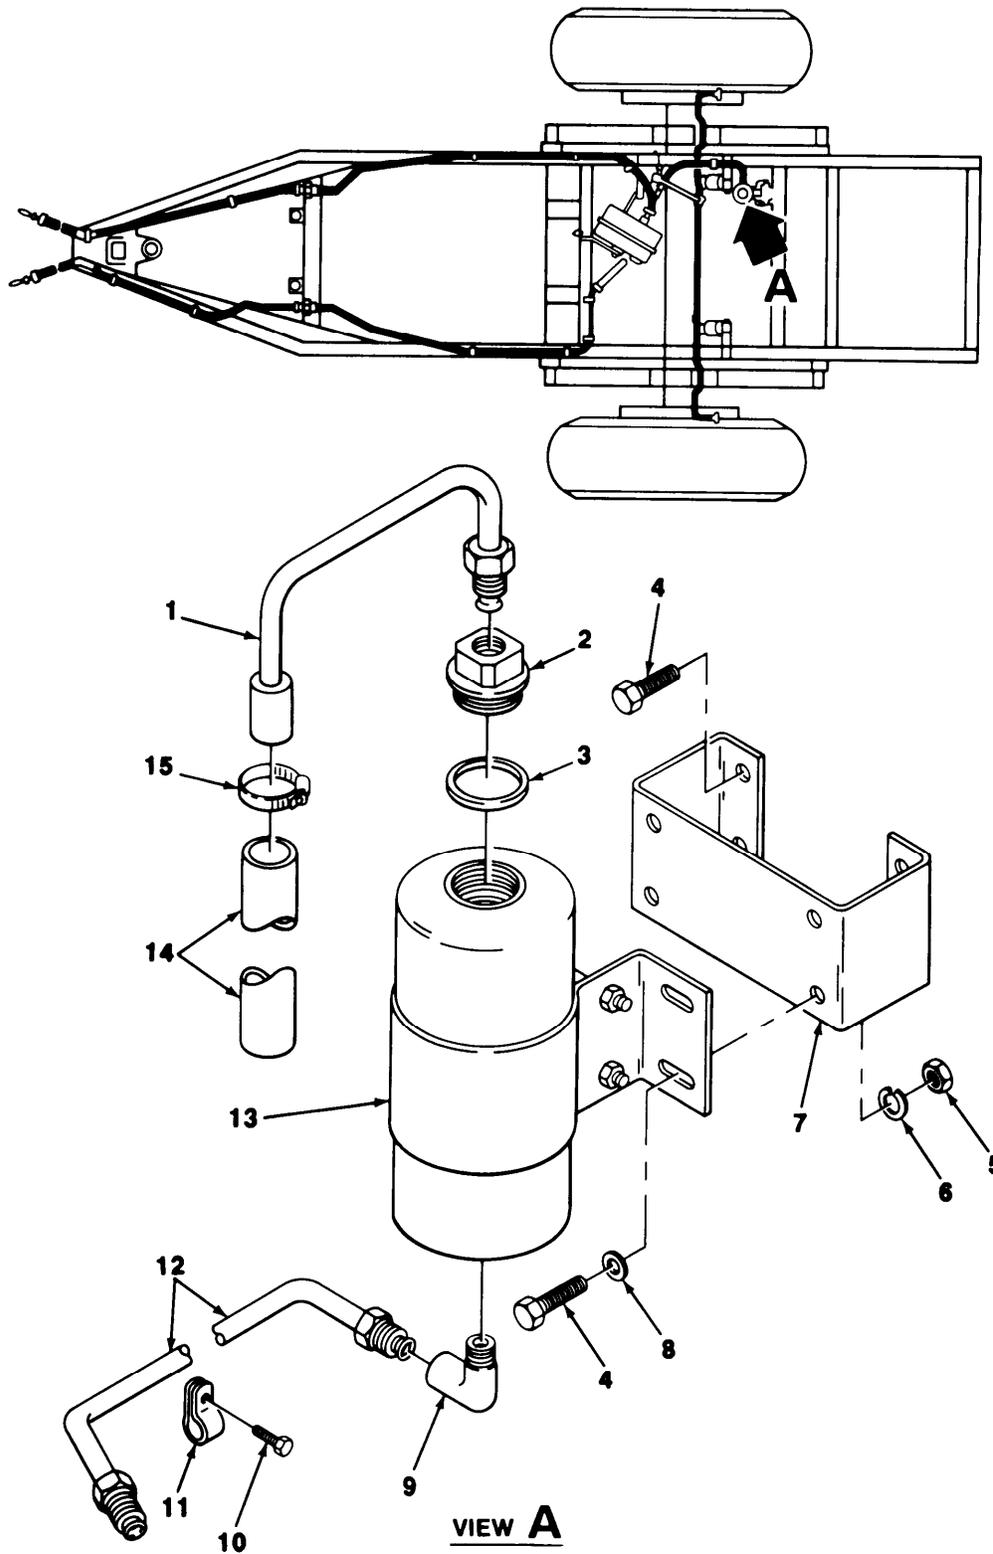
VACUUM HYDRAULIC BRAKE SYSTEM TANK ASSEMBLY (M105A2C).
